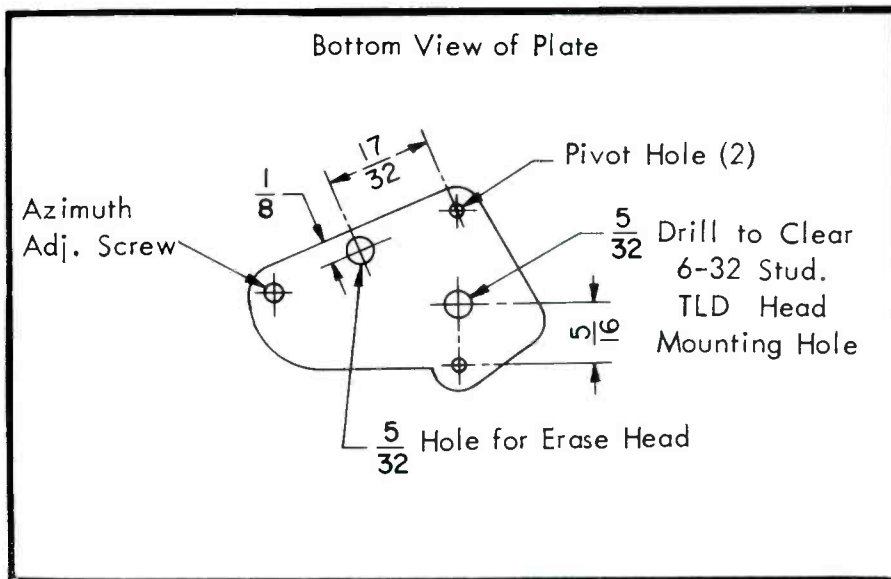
Full-scale template for locating the new head mounting holes in the removable base plate.
